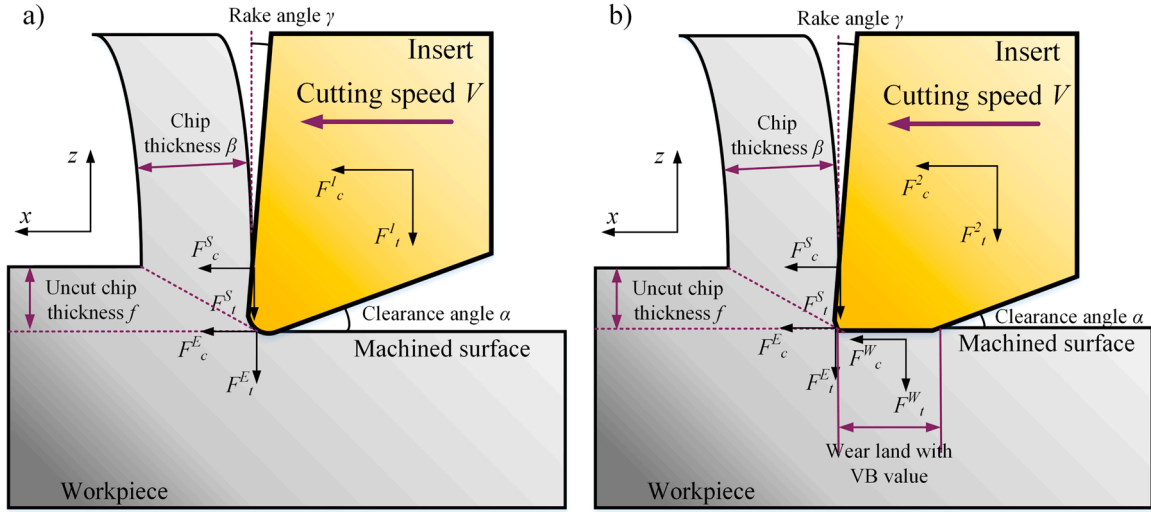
Schematic of cutting forces decomposition [44] for a) fresh tool and b) worn tool.
